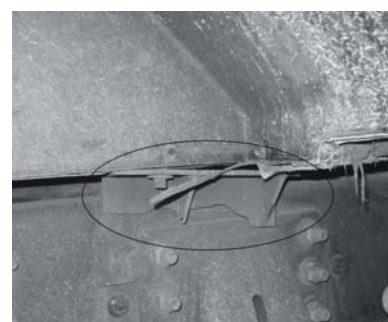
Driver side rear wheel well - the bracket aft of the axle is broken.
